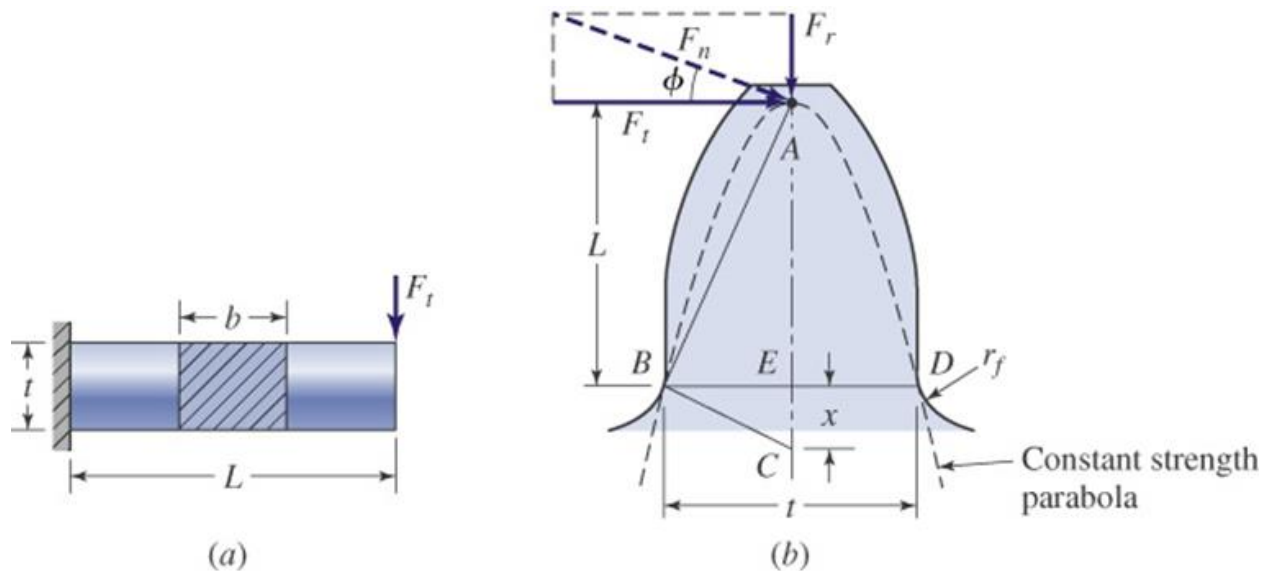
Cantilever beam (a) Gear-tooth (b) [4]
